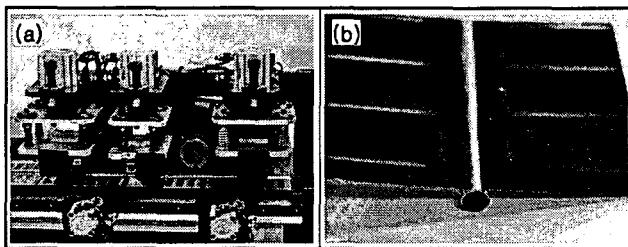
The photos of (a)Ultrasonic seam welding machine and (b)solar collector
